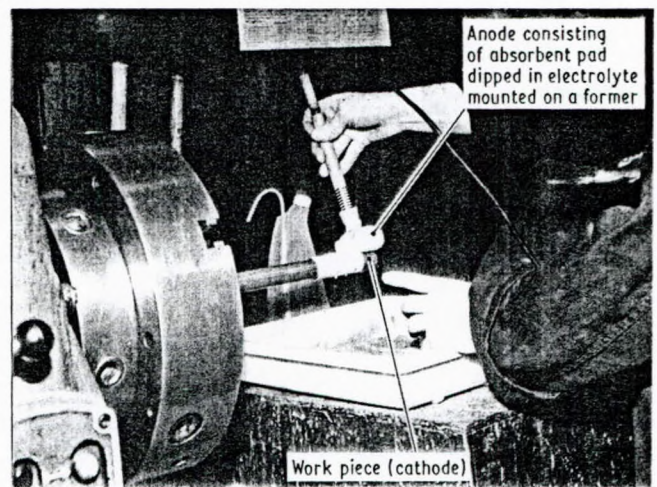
Recovery of a damaged spool valve sleeve by the Selectron electroplating process. The work piece is connected to the negative supply of a power pack through the lathe. The positive supply lead is shown connected to the anode, wrapped in absorbent material soaked in a suitable electrolyte. Metal is deposited from the liquid in the pad on to the work piece at a rate of up to 0.05 mm/min
